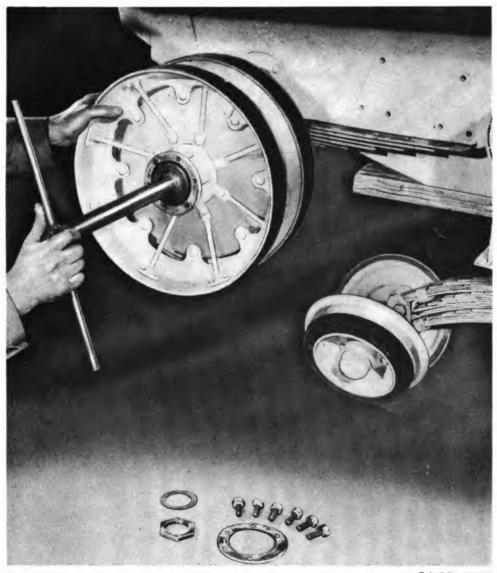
Rear Wheel Crank Arm and Support Tube Parts
